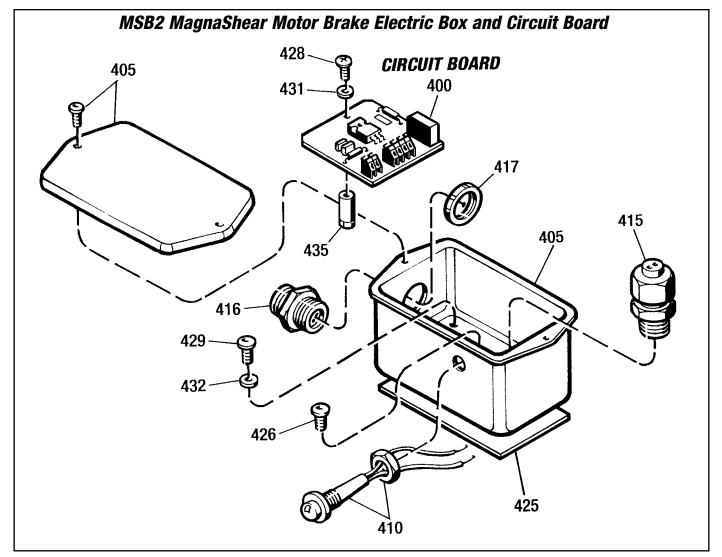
MSB2 MagnaShear Motor Brake - Electric Box and Circuit Board
